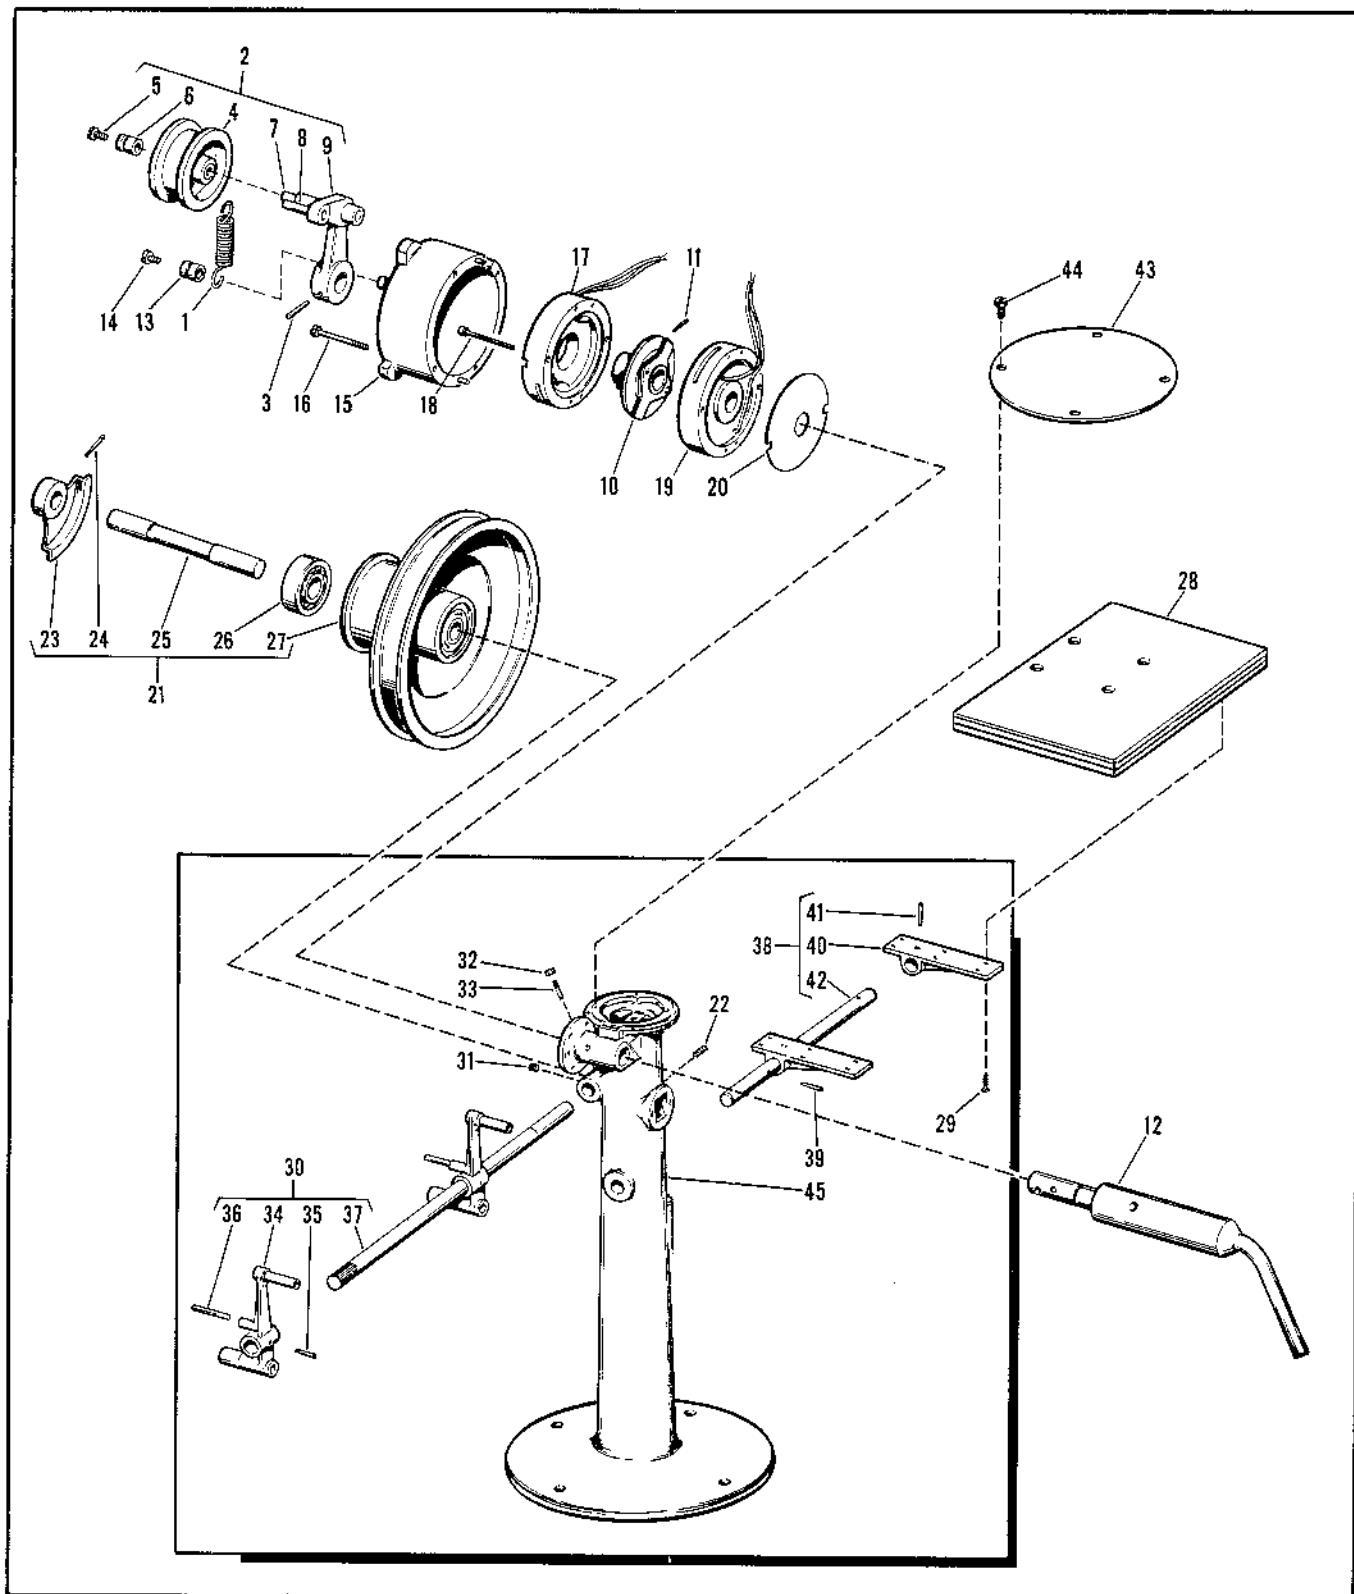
Pedestal Assembly - Sheet 2 of 2 Sheets
